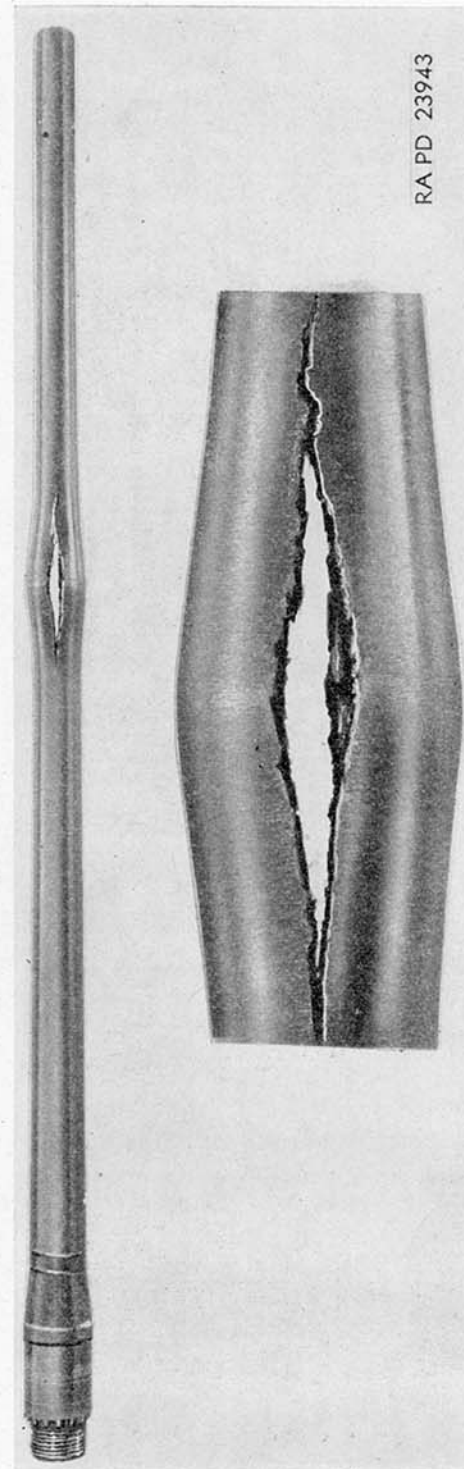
Damage from firing with hard object lodged in bore, cal. .30 machine gun.
